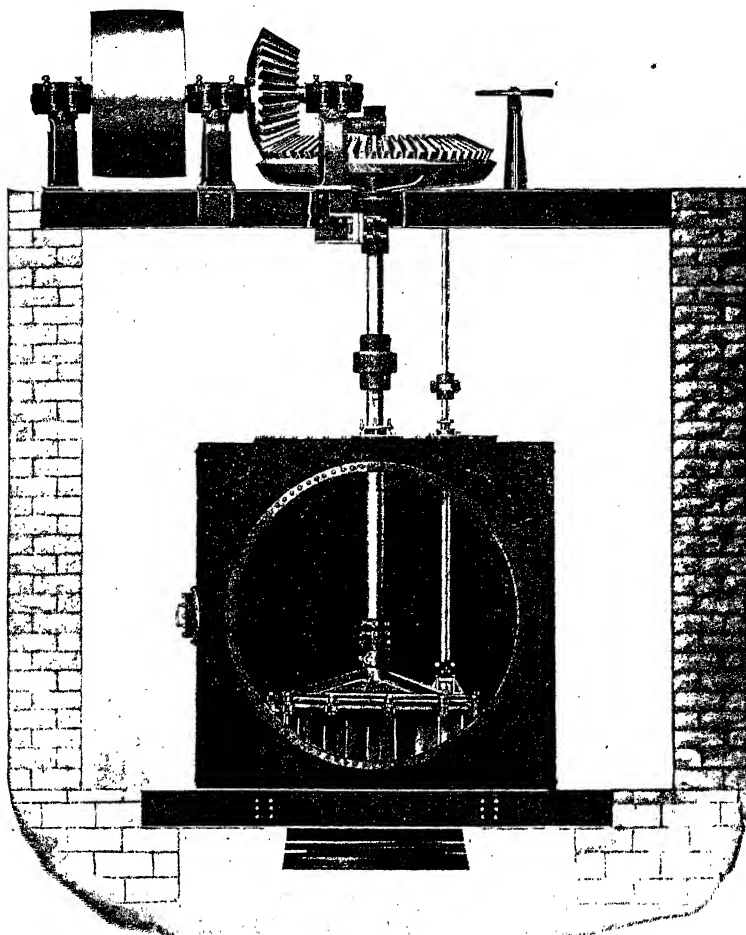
Vertical-Shaft Turbine in Steel Flume
